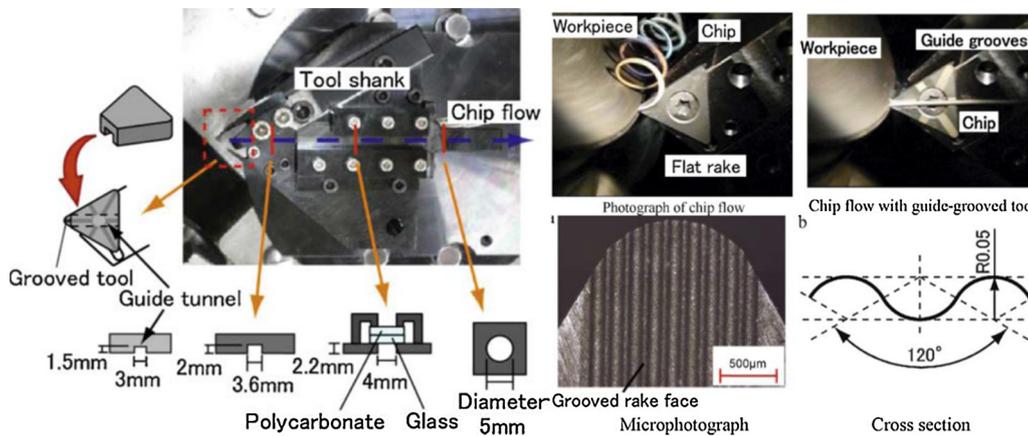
Guide tunnel and cutting tool design enabling chip flow [89].
